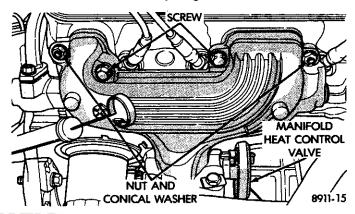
Exhaust Manifold Installation (Right Manifold Shown)—3.9L
